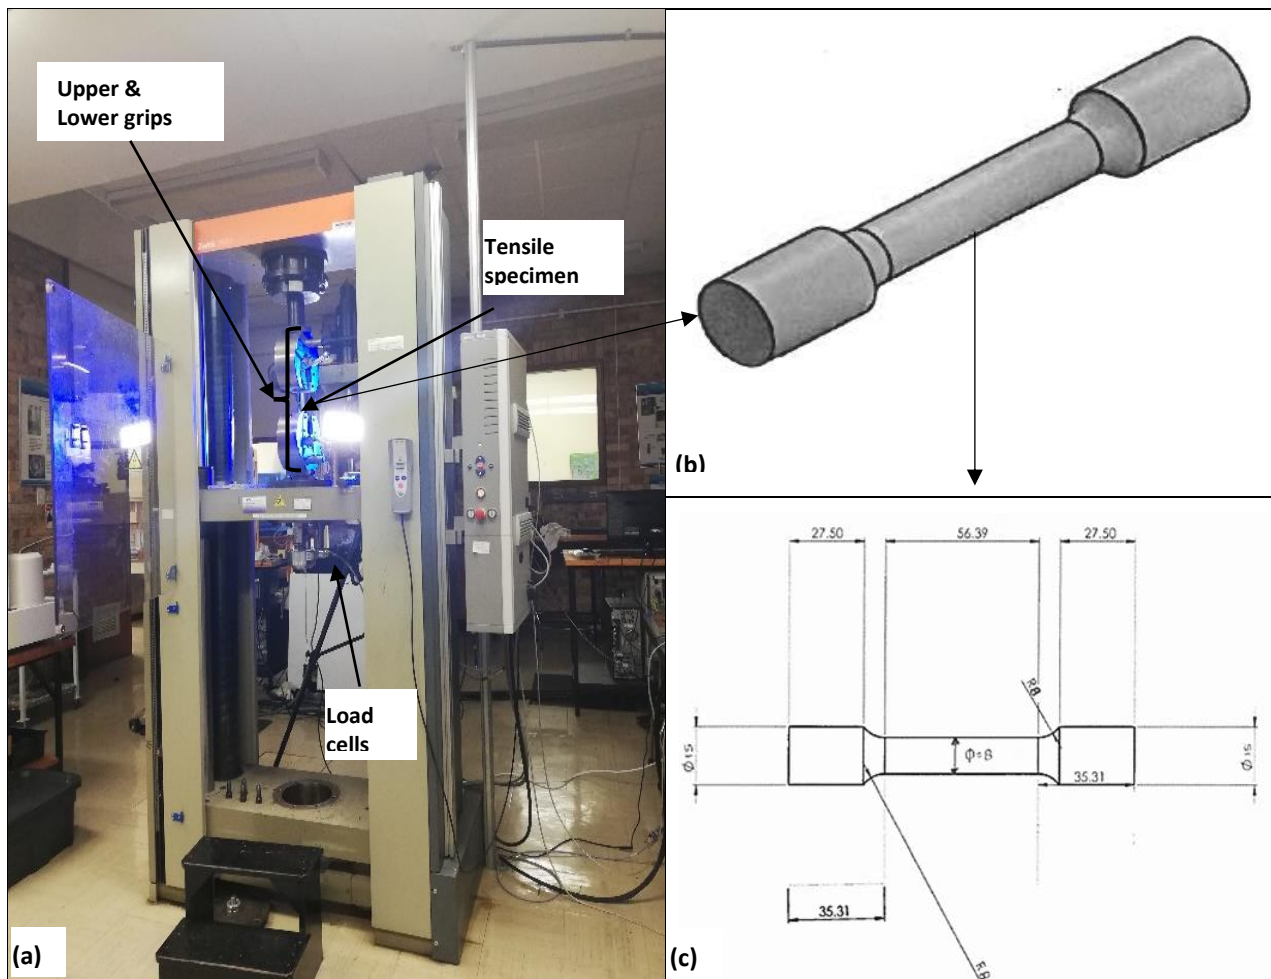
(a) Zwick universal 1484 tensile testing machine at UCT, CME laboratory, (b) Tension test specimen, (c) Dog-bone shaped tension test specimen geometry
